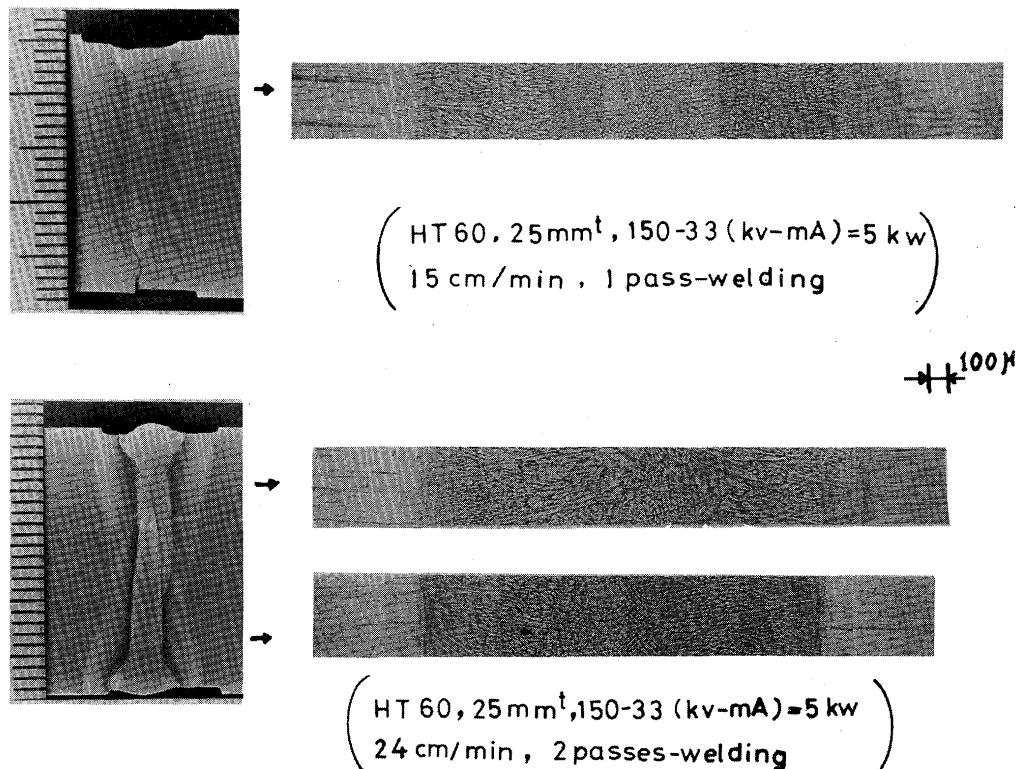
Macro and microphotographs of welds without preheating for HT—60 steel by use of high voltage type E·B welder.
